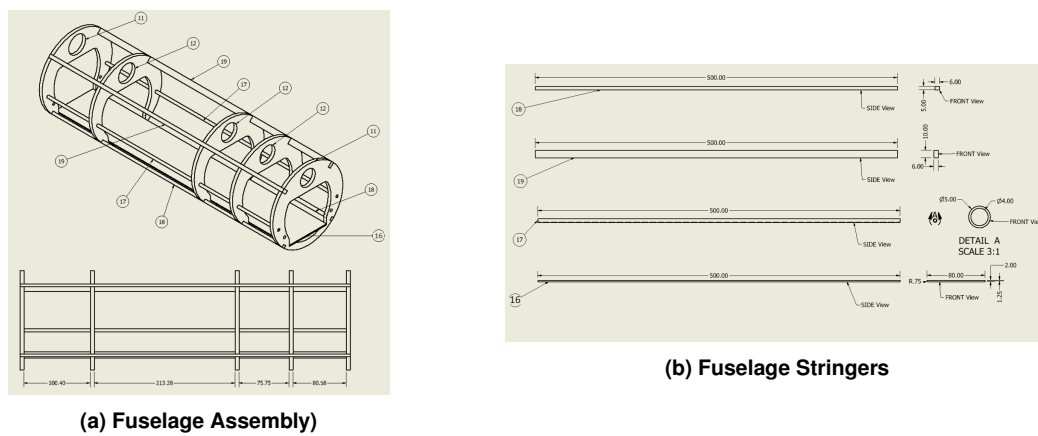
Orthographic drawings of the Fuselage assembly and Fuselage stringers
